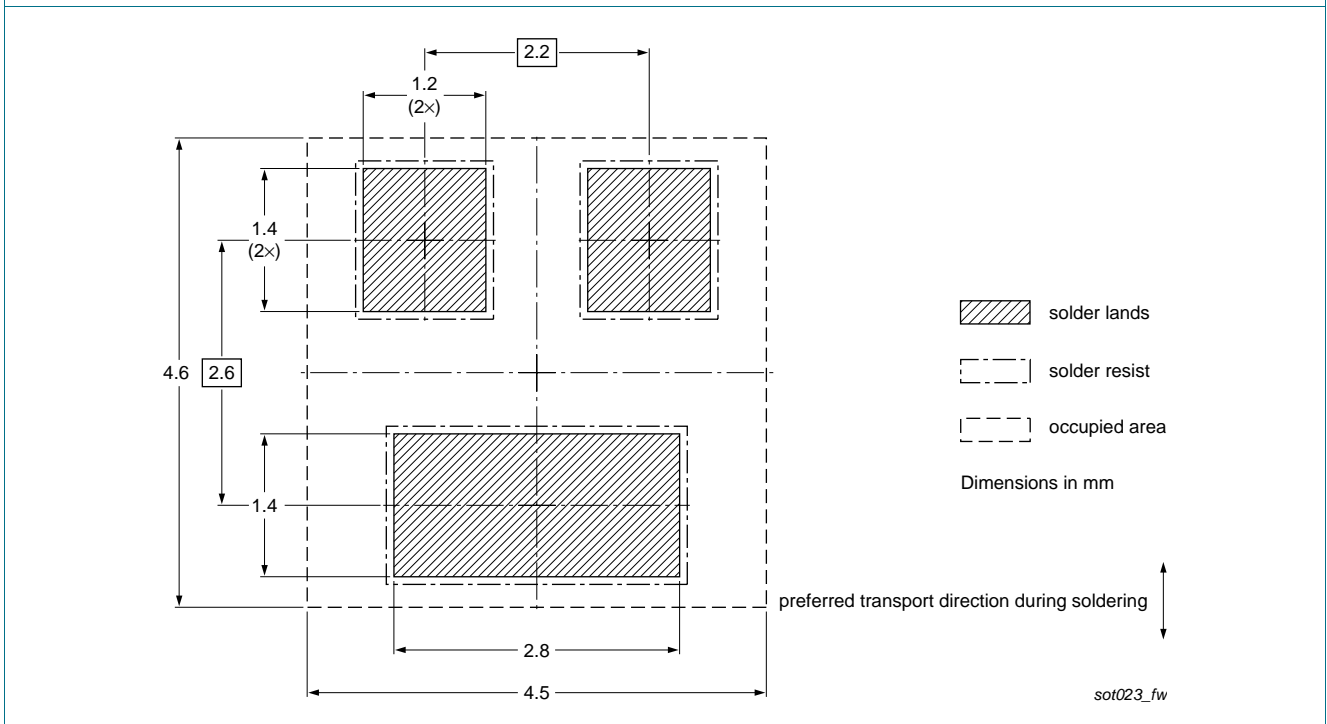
Wave soldering footprint for SOT23 (TO-236AB)
